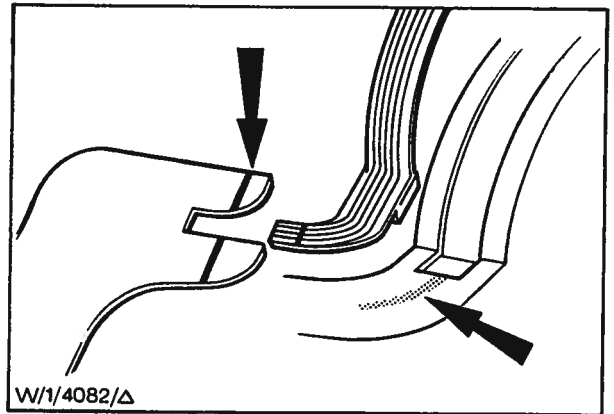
Oil Pan Rear Seal and Gasket Installation - 2728T Engines
